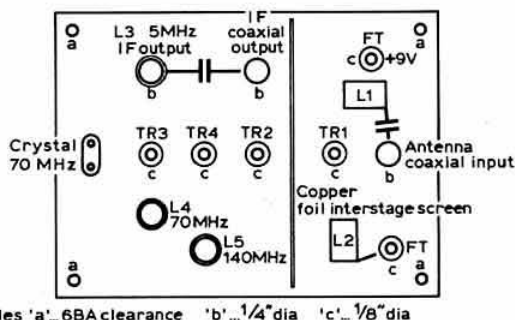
Suggested layout of the 144-146MHz version constructed on a 4 by 3in section of pcb to mate with the lid of a  $4\frac{1}{2}$  by  $3\frac{1}{2}$ in die-cast case (Hole marked "IF coaxial output" should read "IFT coaxial output")
